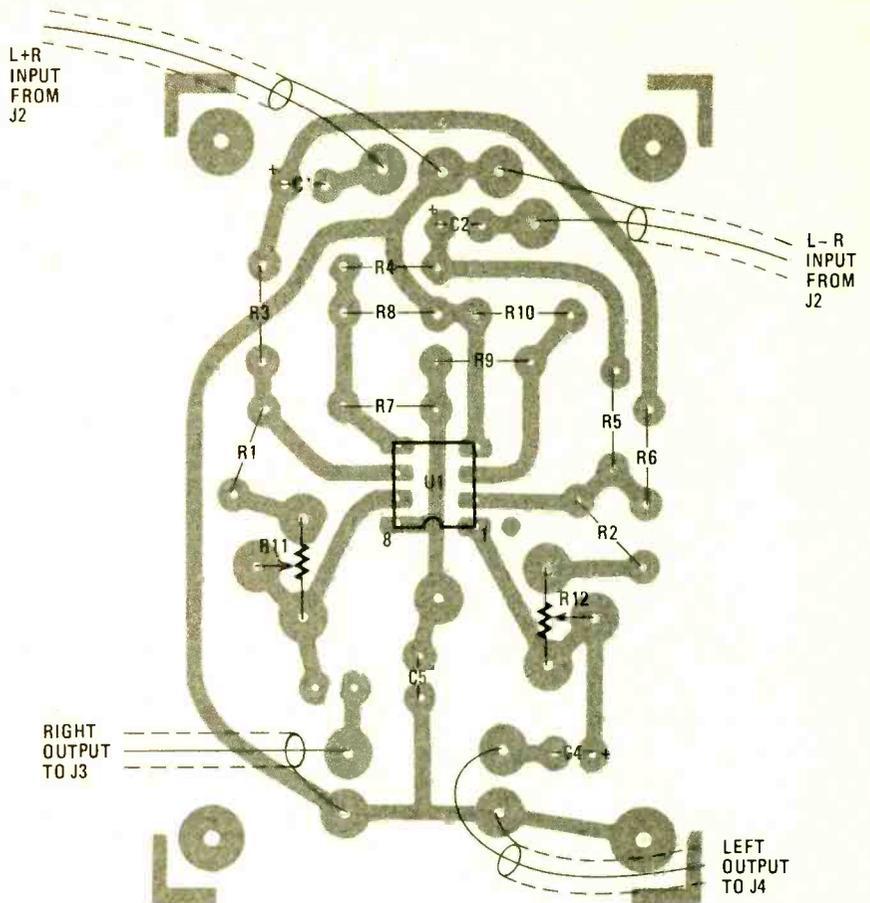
PARTS LOCATION DIAGRAM shows the printed circuit board with foil-side down. Shielded cables interconnect the printed-circuit board with the RCA phono jacks, J1-J4, on the chassis-box apron, power cable exit other side.
